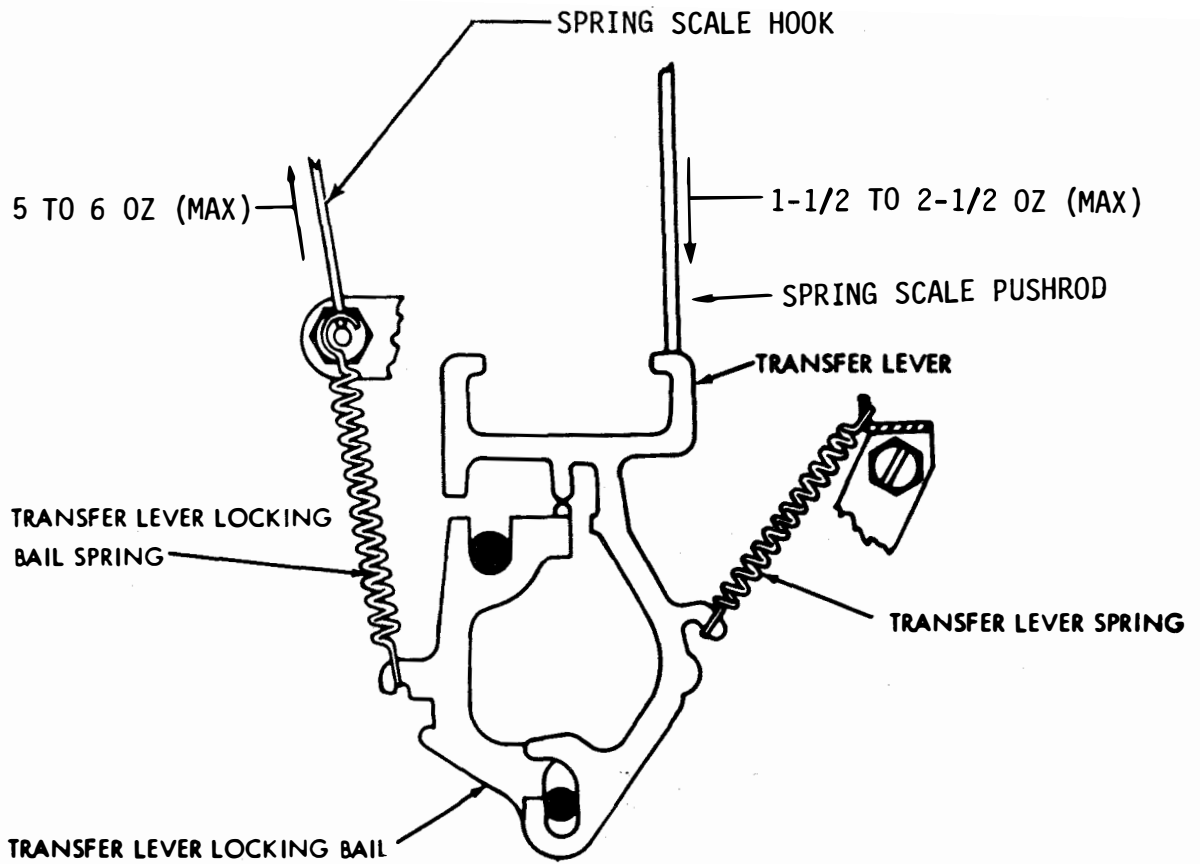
Transfer Lever Spring and Locking Bail Spring
